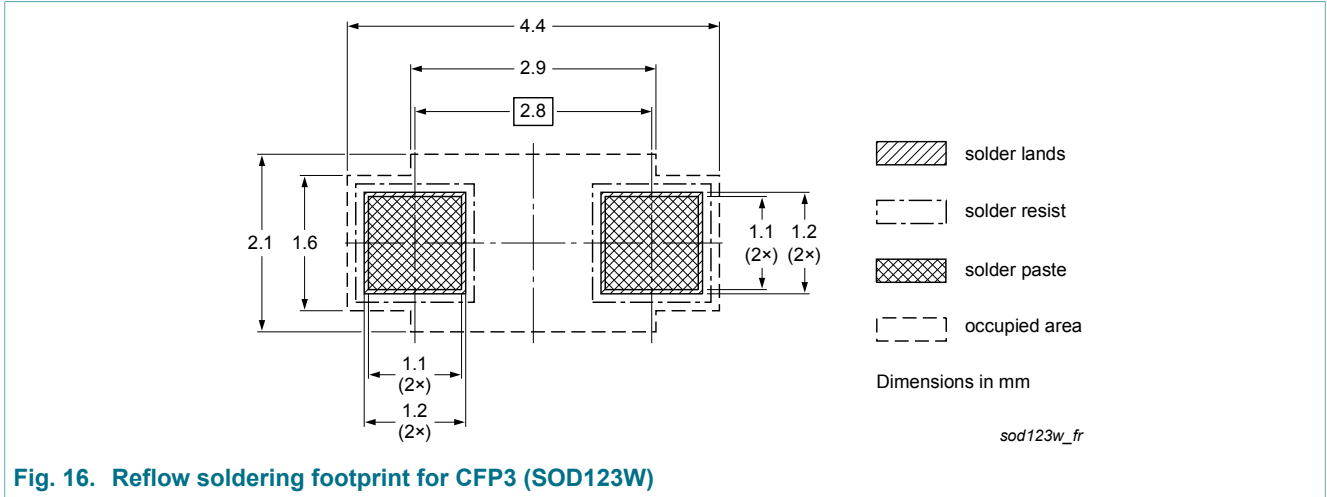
Reflow soldering footprint for CFP3 (SOD123W)
